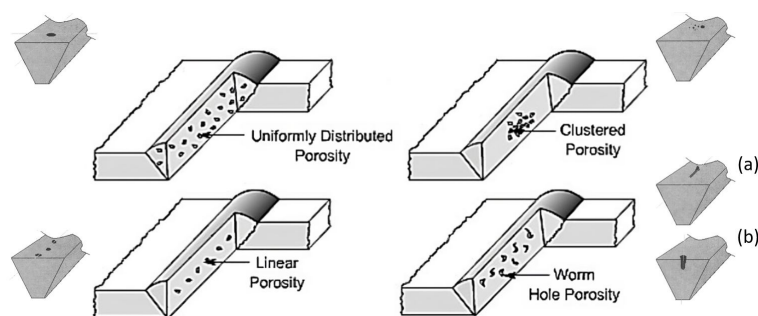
Porosity in a V-groove weld [21, 4]
